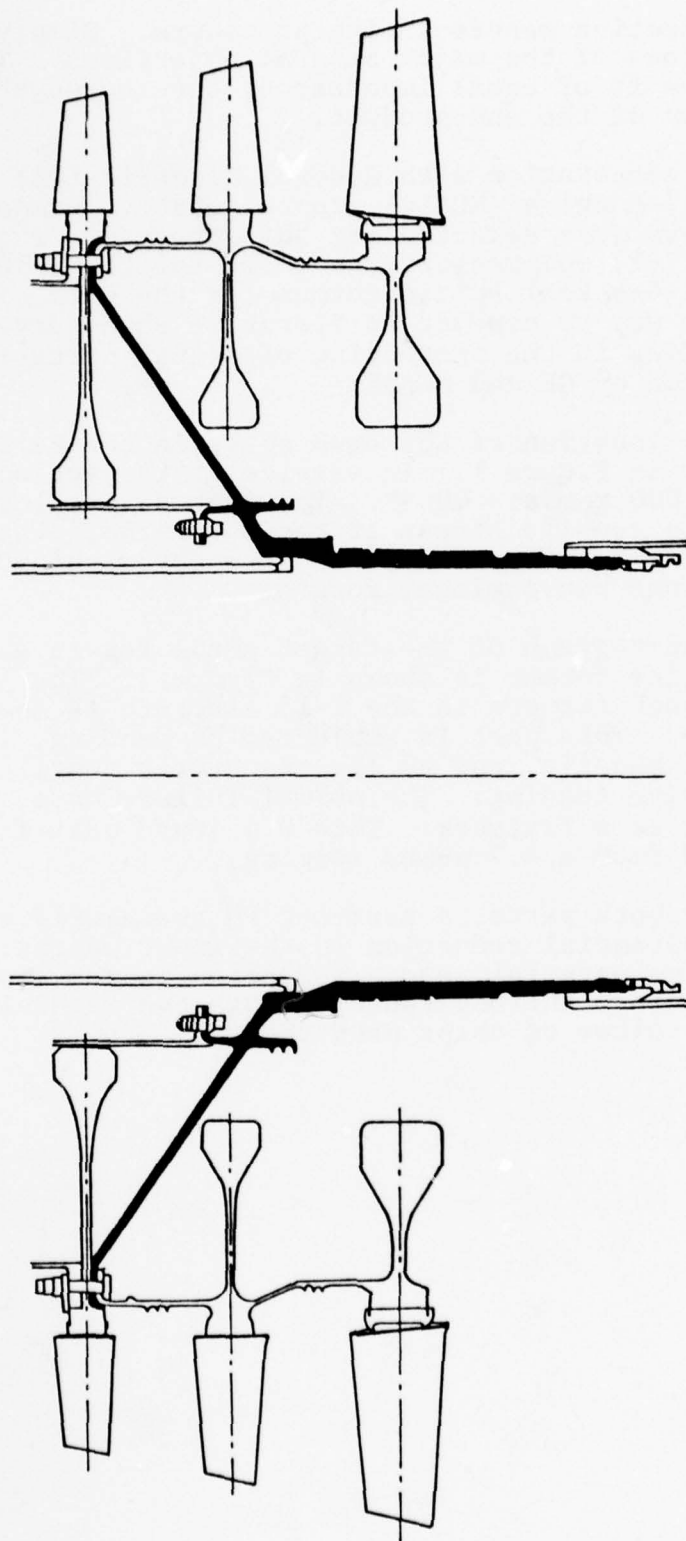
Isolated view of Ti-17 stub shaft location in F-101 Engine.
